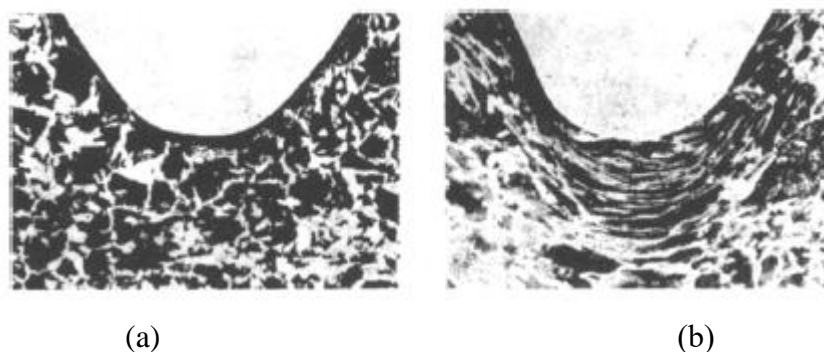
Microstructure of specimens with thread (a) by cutting (b) by rolling
